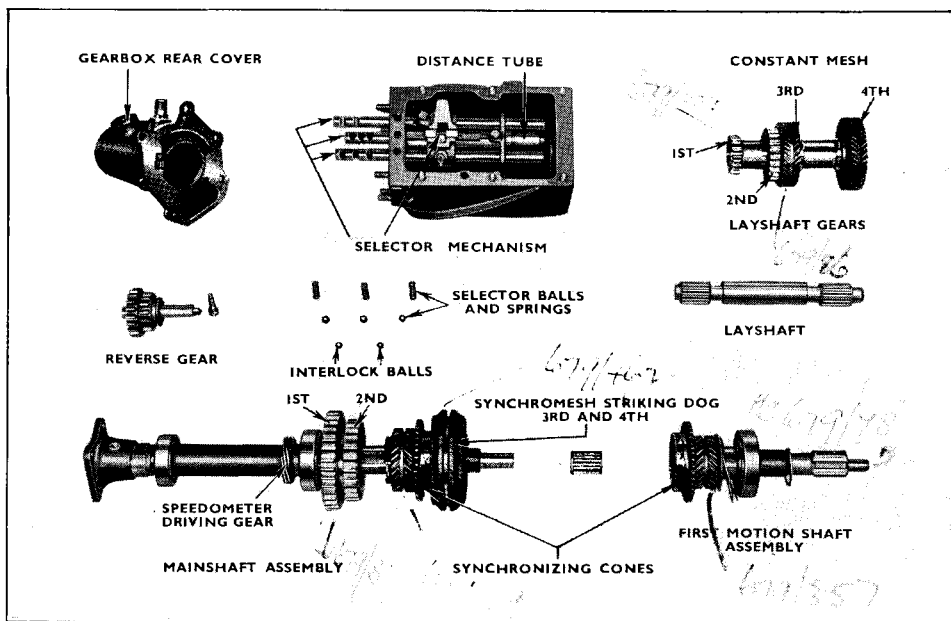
Illustration No. 36.—Synchromesh gearbox dismantled to show interior mechanism.
